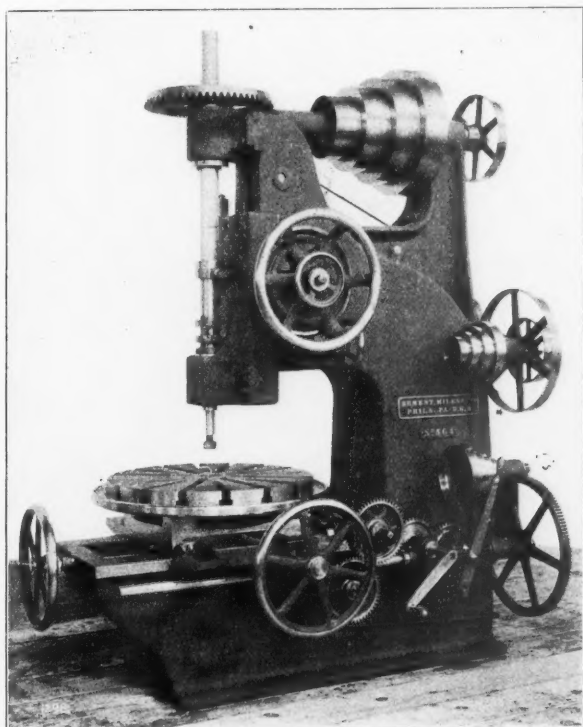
The Niles-Bement-Pond No. 9 Vertical Milling Machine.
